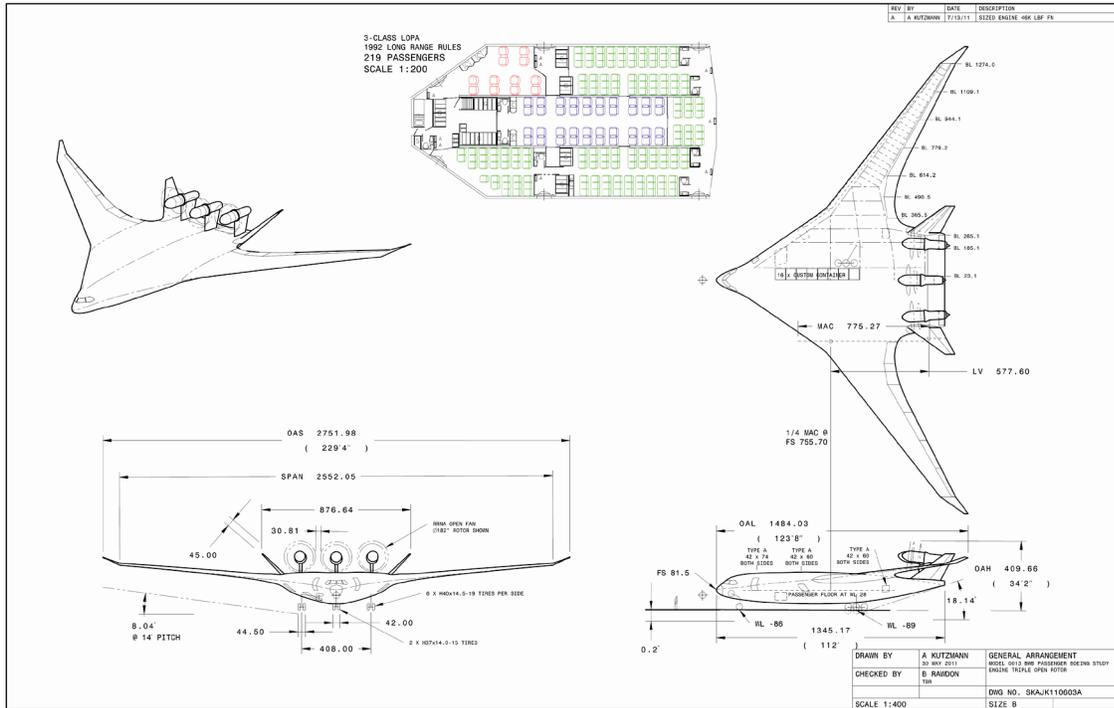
General Arrangement Drawing – 2025 BWB-0013 Passenger
